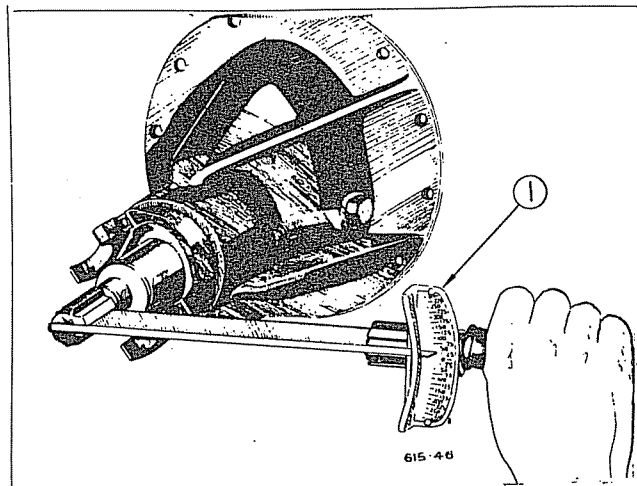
Checking Drive Pinion Bearing Pre-Load.
